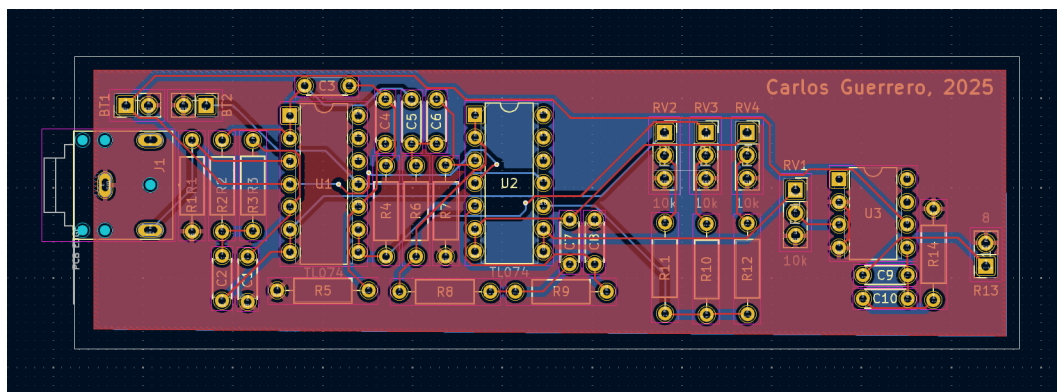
The final 2-layer PCB layout in KiCad, showing component placement and the top-layer ground plane pour.
